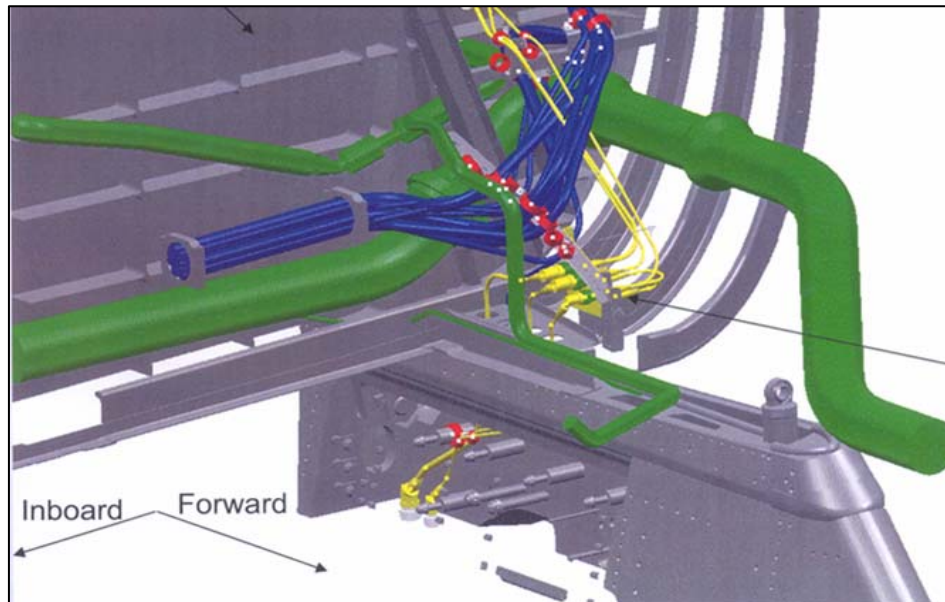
Cutaway Revealing Existing Aircraft Conduit & Wiring Interface [5]
